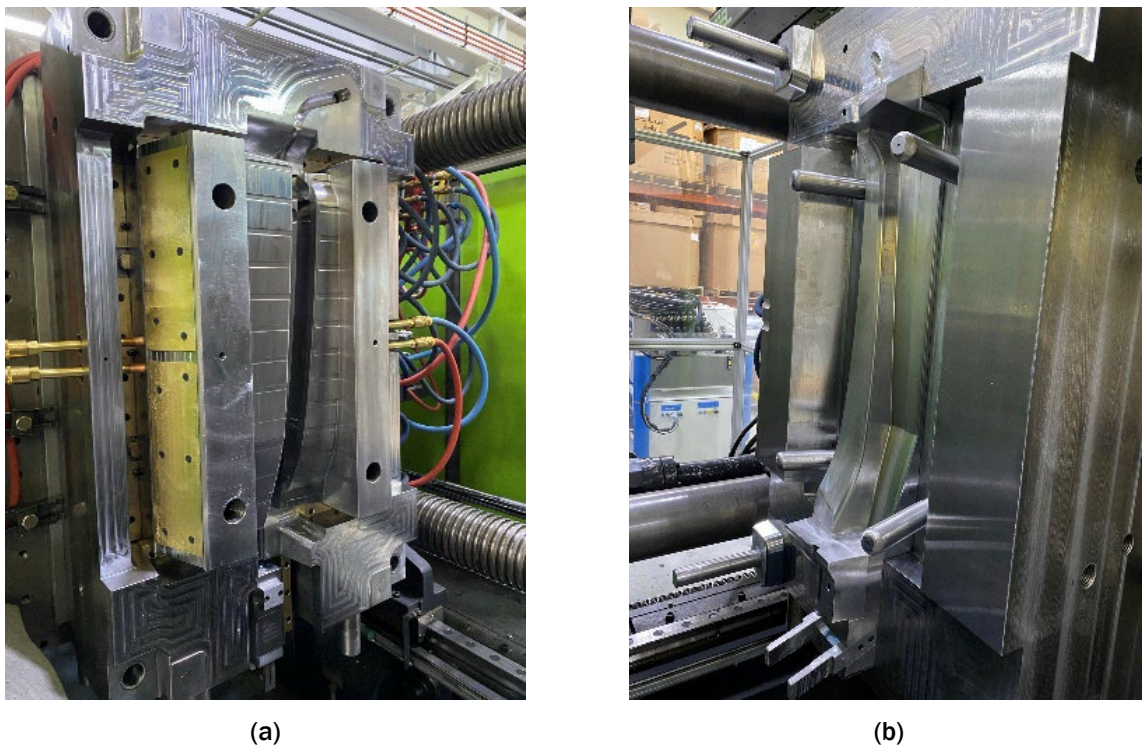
Technology demonstrator mold for (a) the moving half and (b) the fixed half. Source: Ford.
